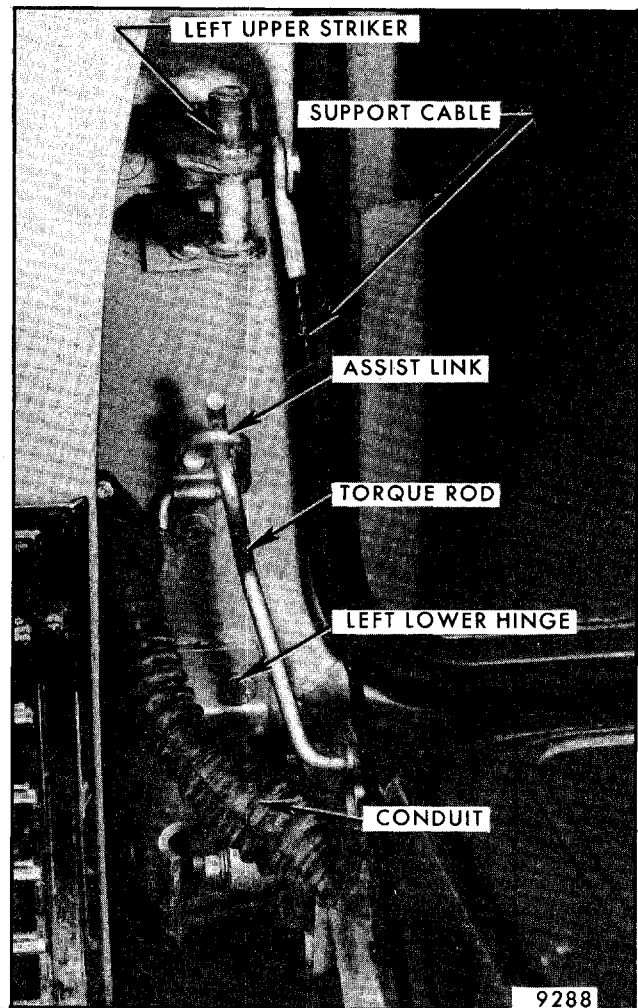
Tailgate Left Upper and Lower Lock Assemblies
